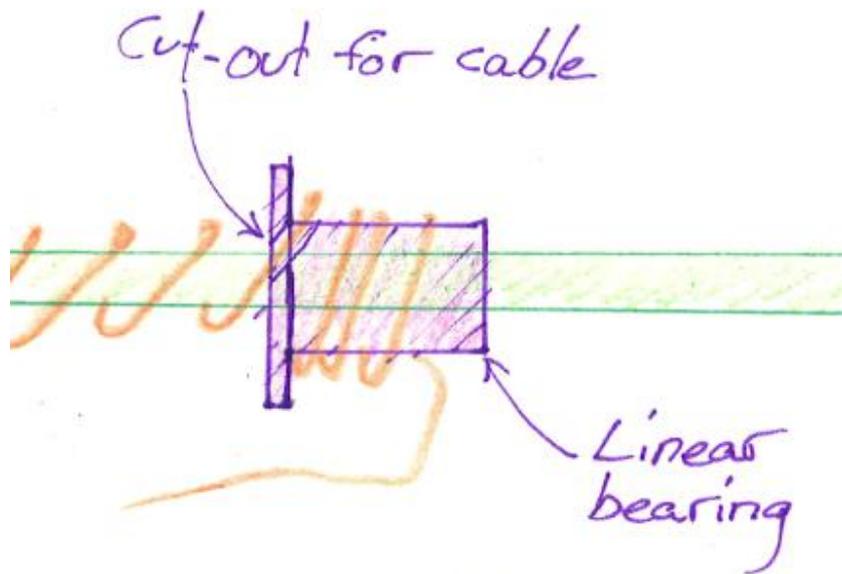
Linear bearing concept. The spiral cable is coiled on top of the bearing which prevents the support wire to cause severe abrasion on the spiral cable. The spiral cable is held in place by snapping it in into a cut-out in the flange. The flange also prevents the cable from buckling.
